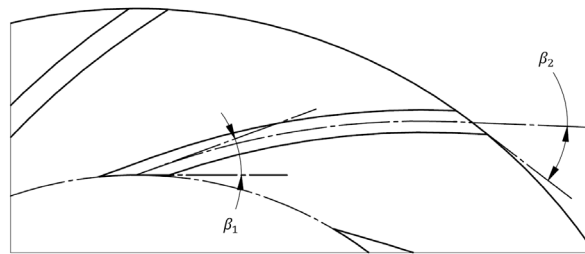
A drawing of the impeller blades with the entrance and exit angles labeled.
